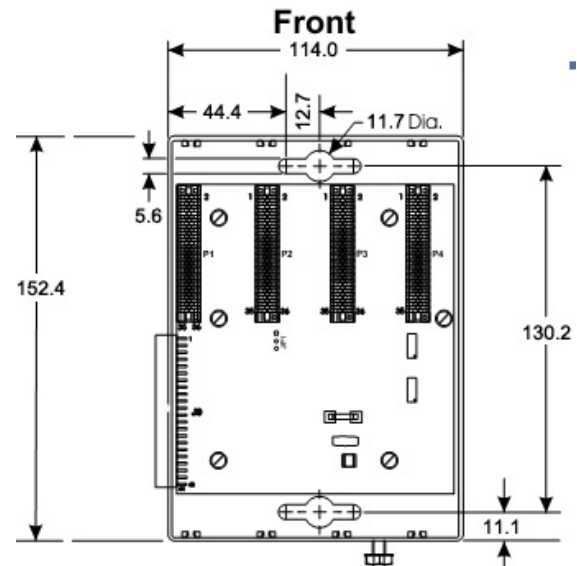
ControlWave Micro 4-Slot Expansion Housing Dimensions (in millimeters)
